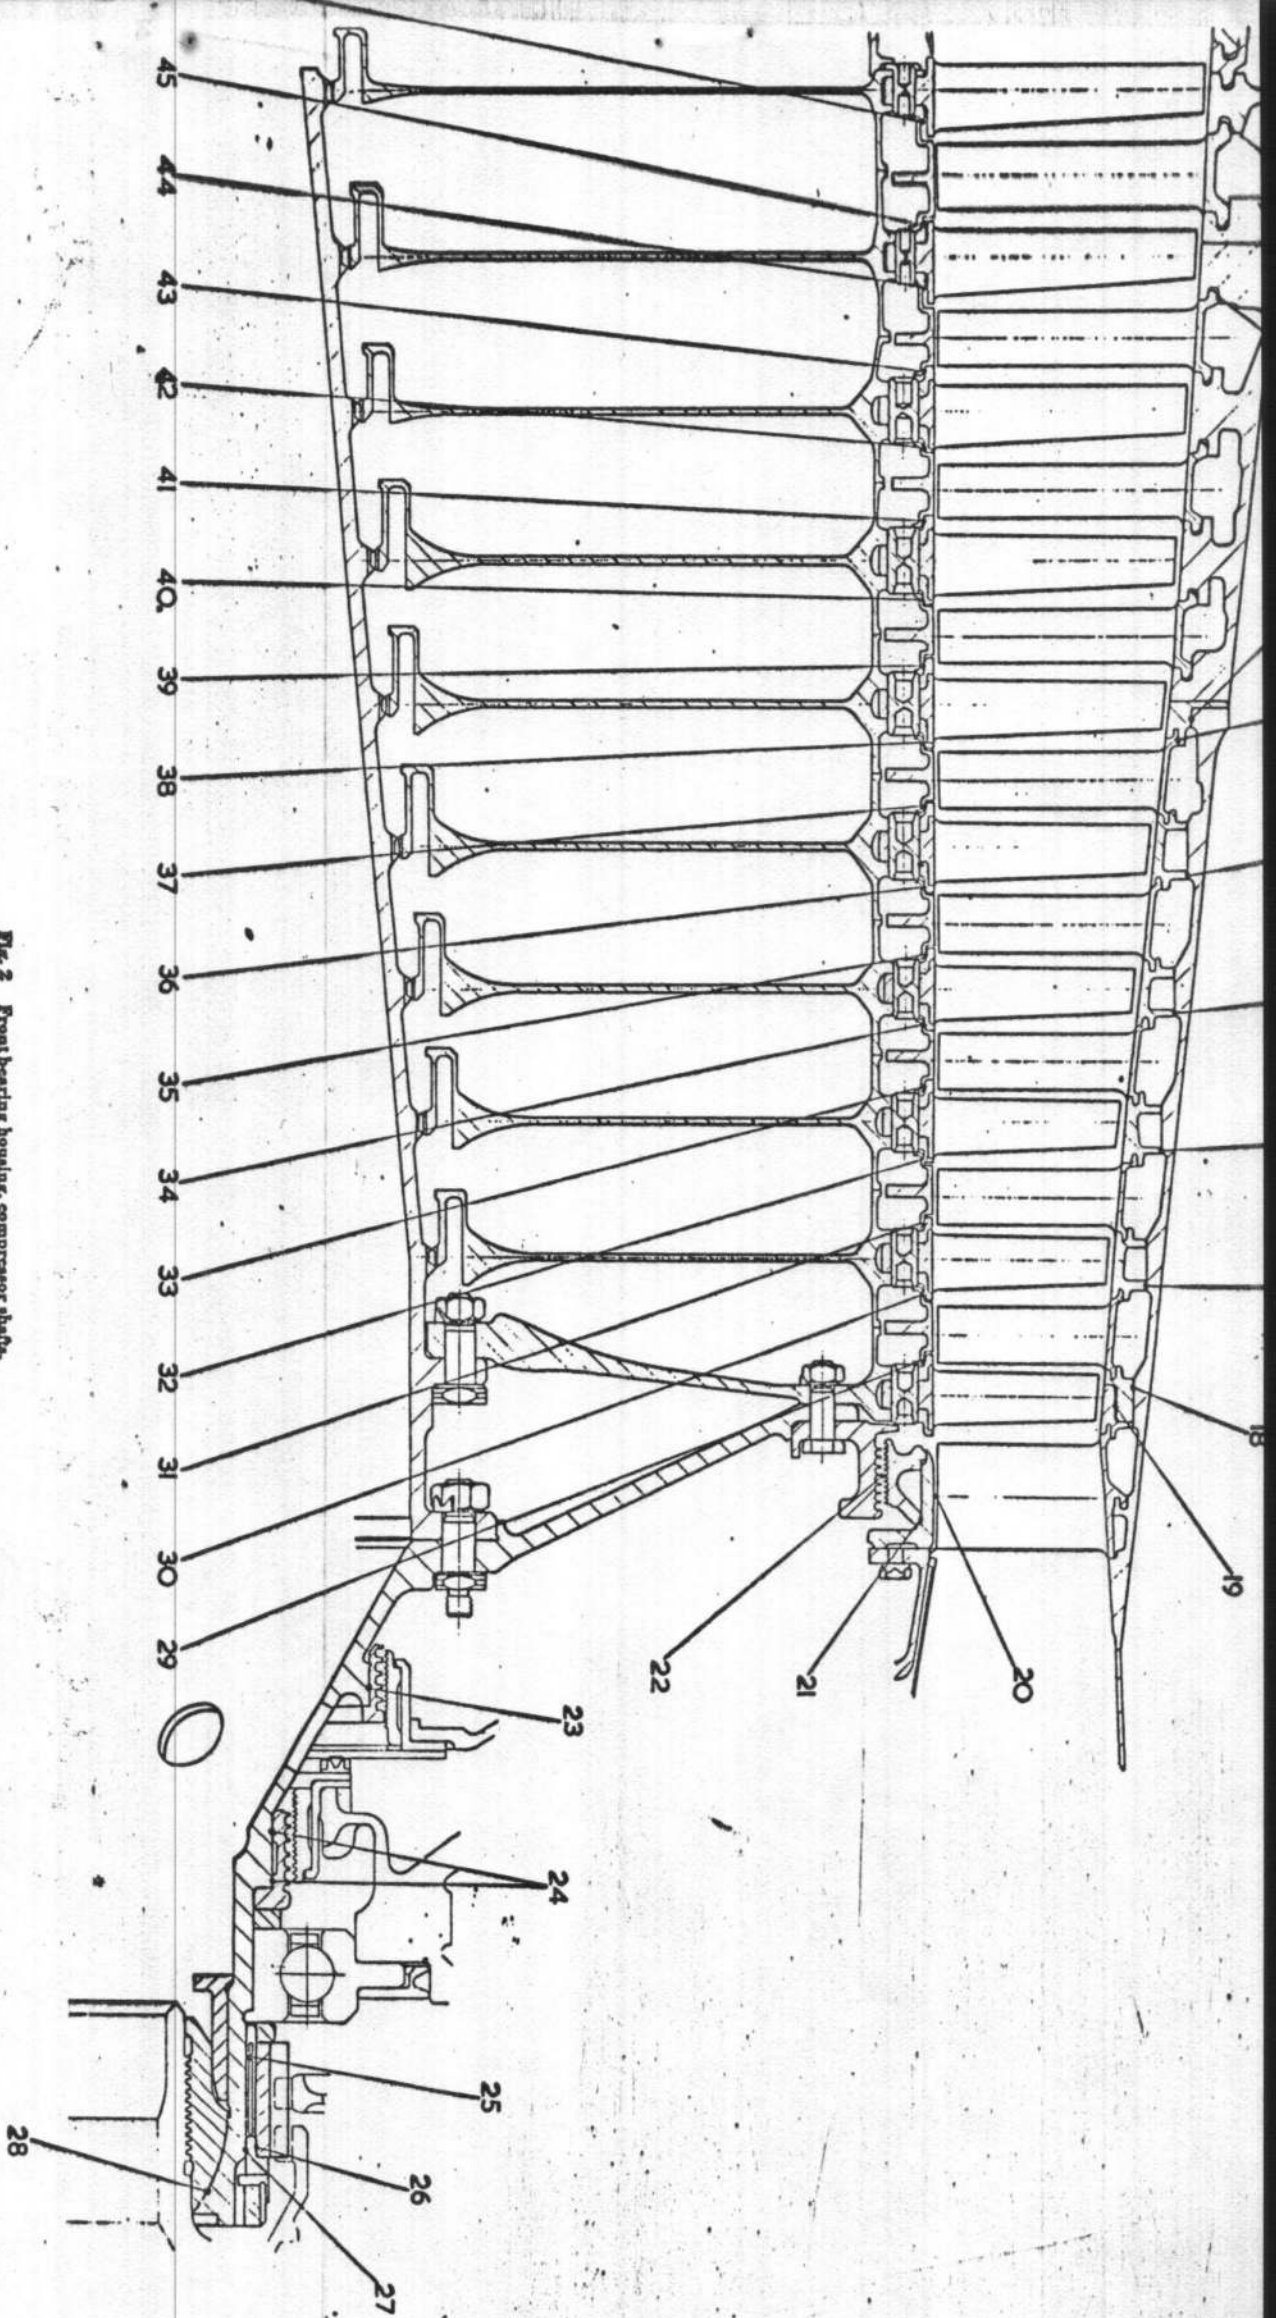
Front bearing housing, compressor shaft, rotors and outlet casing
